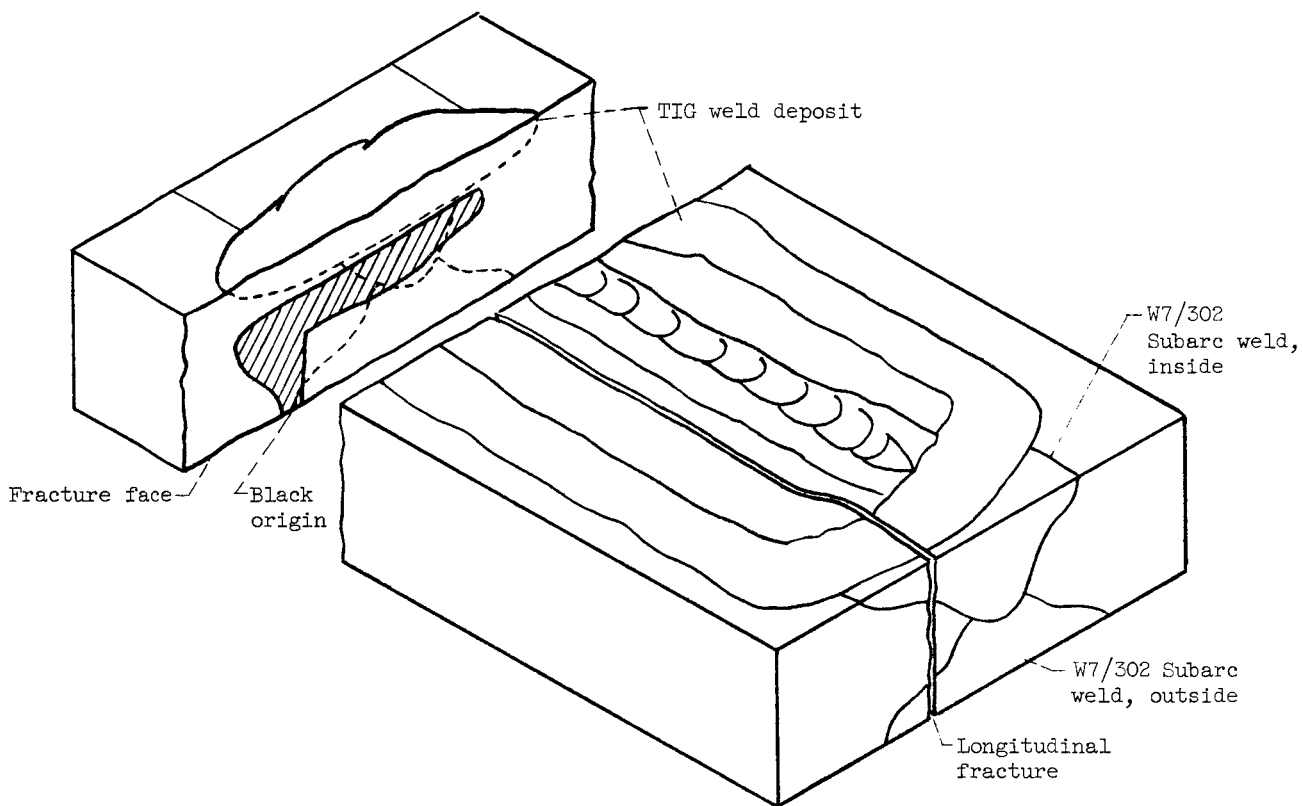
Isometric drawing showing relation of black origin to weld deposits.
